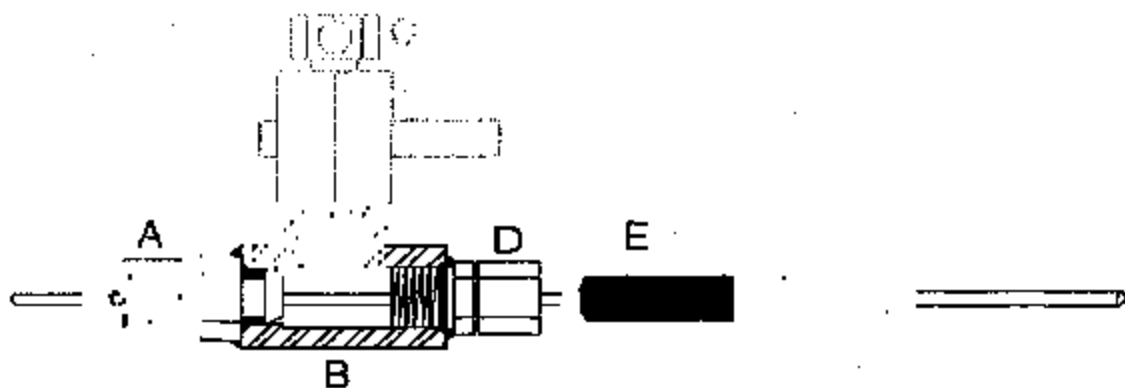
Installation of the Thermocouple to Measure Brake Fluid Temperatures Inside the Caliper; Probe Inserted through the Bleeder Valve
